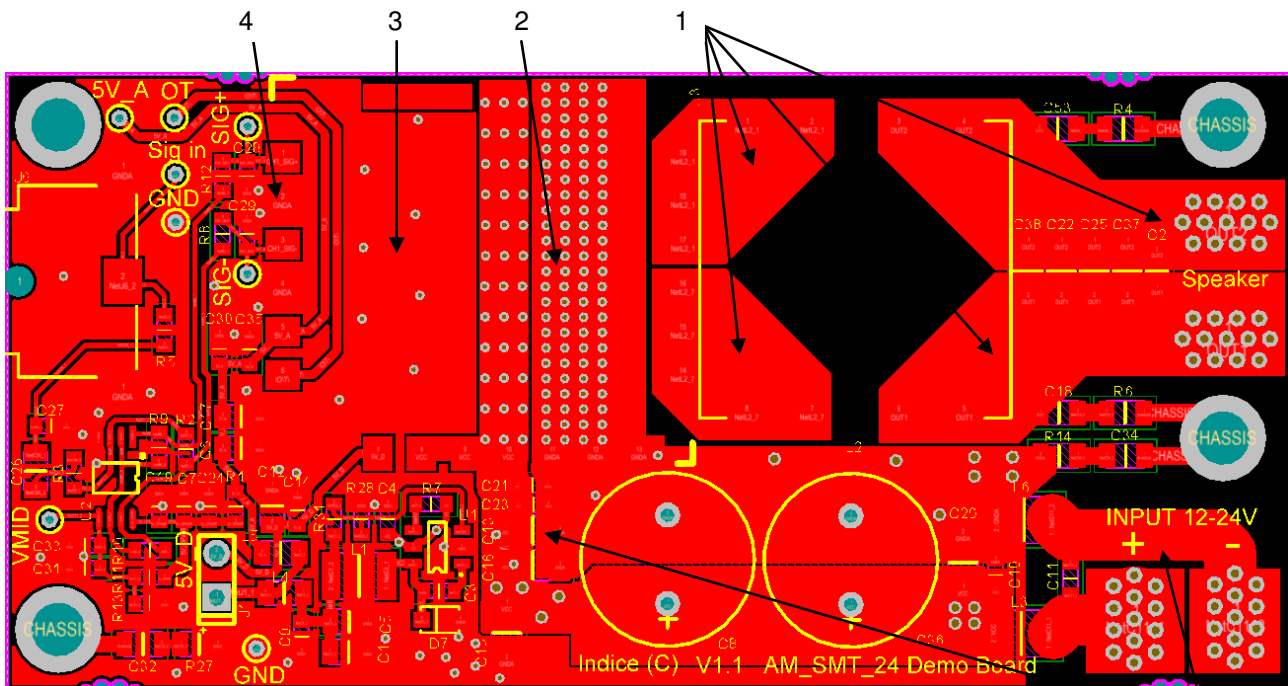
Top layer suggestions for the AM-SMT-24-01 PCB layout
